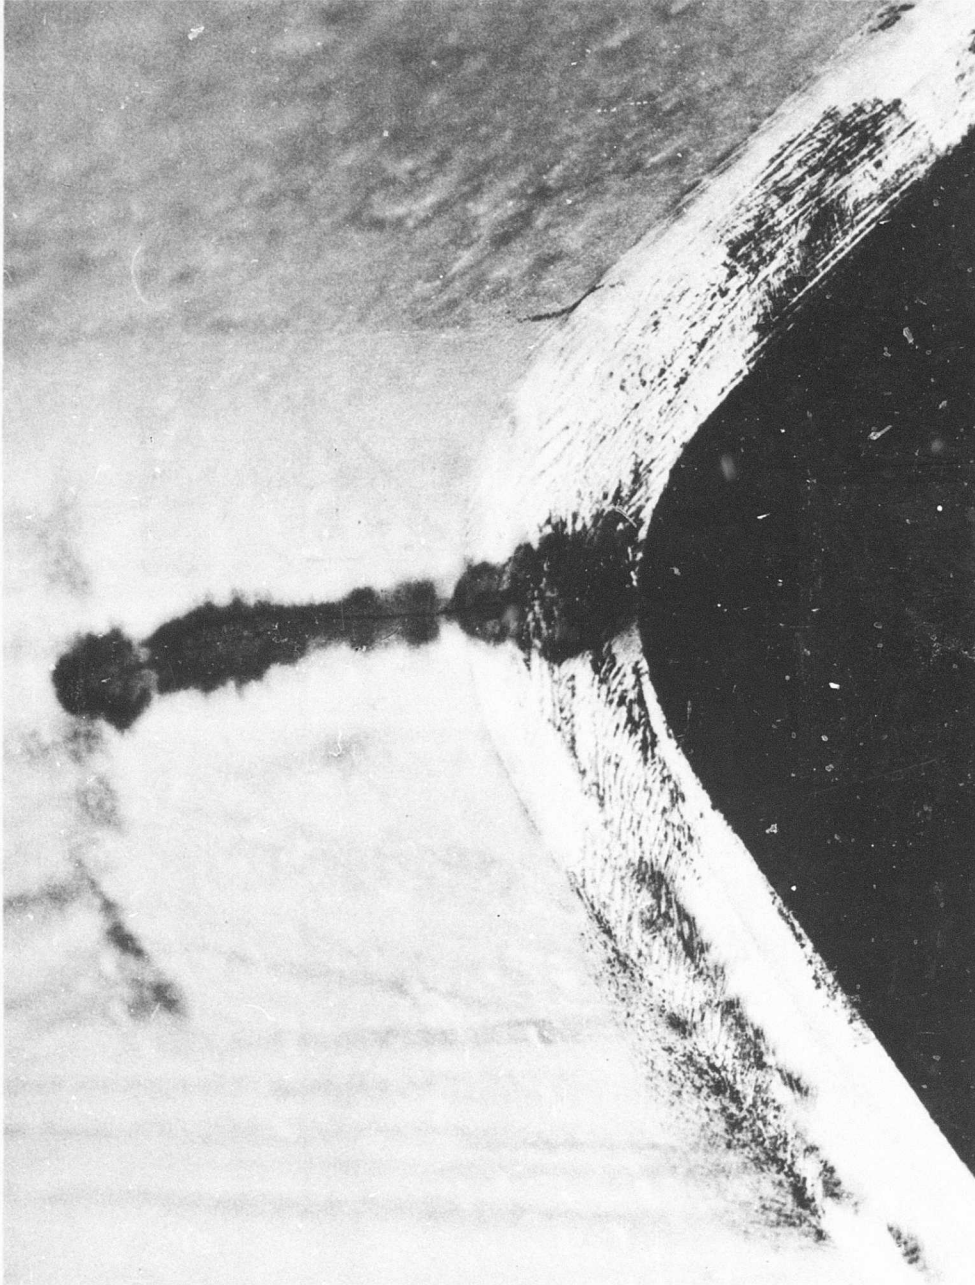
Quench Crack in 1/2" Bend Radius Specimen.
